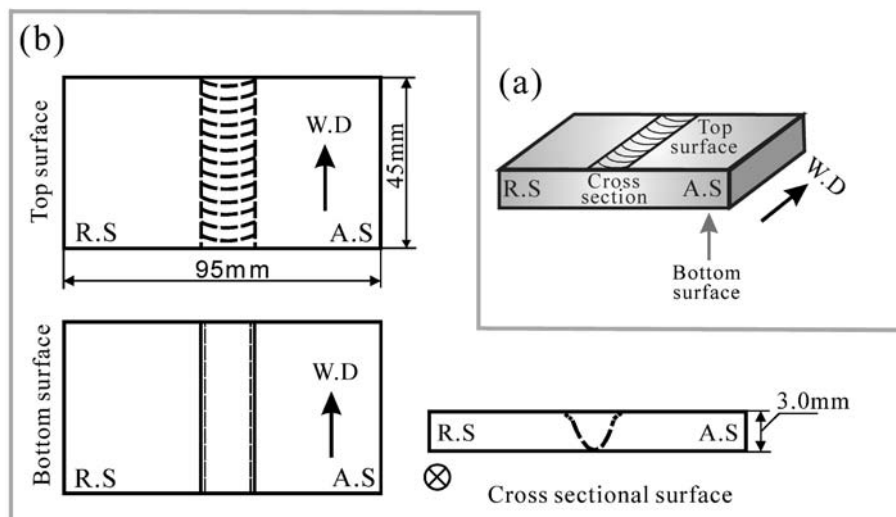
Shape and size of specimen for cyclic salt spray corrosion tests. W.D: Weld direction, A.S: Advancing side, R.S: Retreating side.
